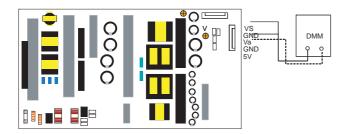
42inch Power PCB Assy Voltage Adjustment
